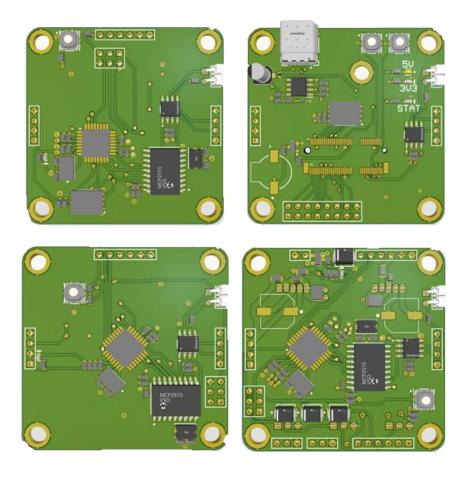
The four avionics boards in altium (Top left- Telemetry Board, Top right – Controller Board, Bottom left – Sensor Board, Bottom right- Power Board).
